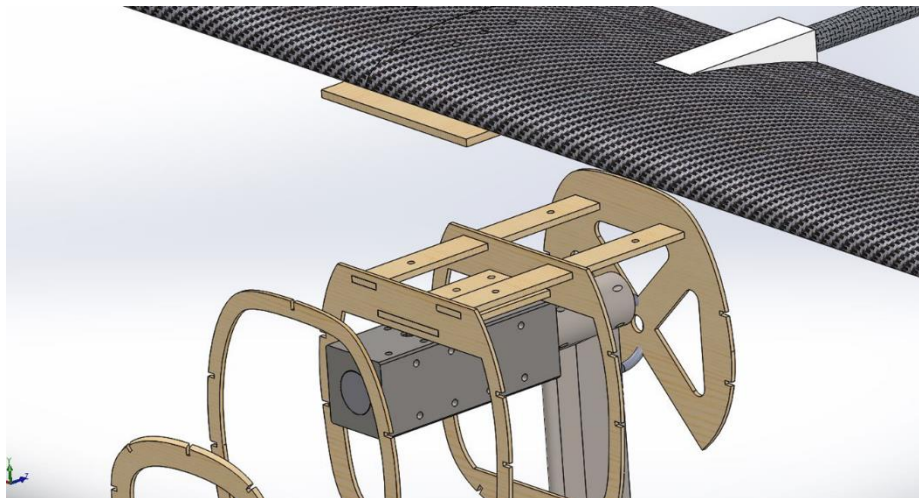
Wind tunnel sting inside the aircraft fuselage CAD view
